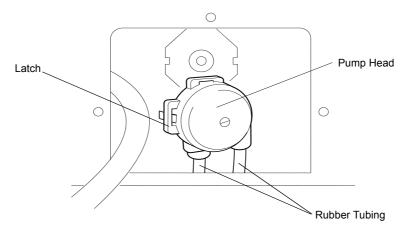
Replacing the Pump Head of the Rinse Pump
